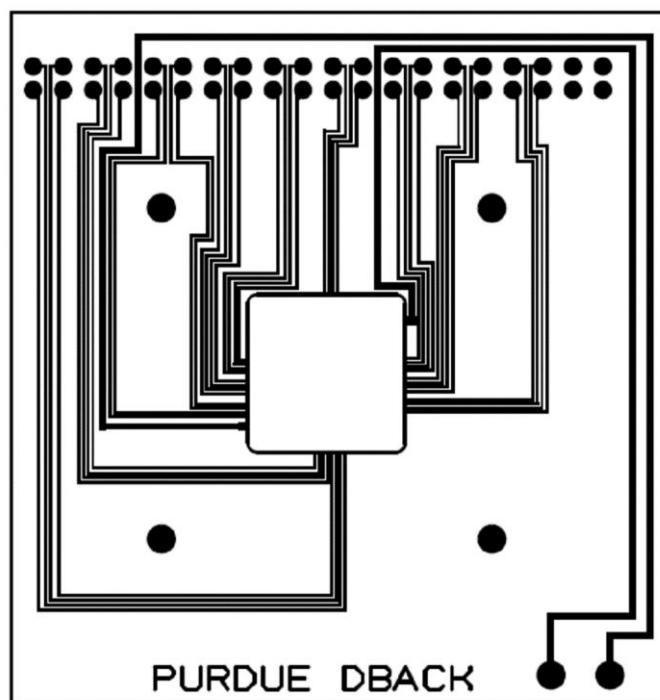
Mask design of the printed circuit board used for the background-only heater design.
